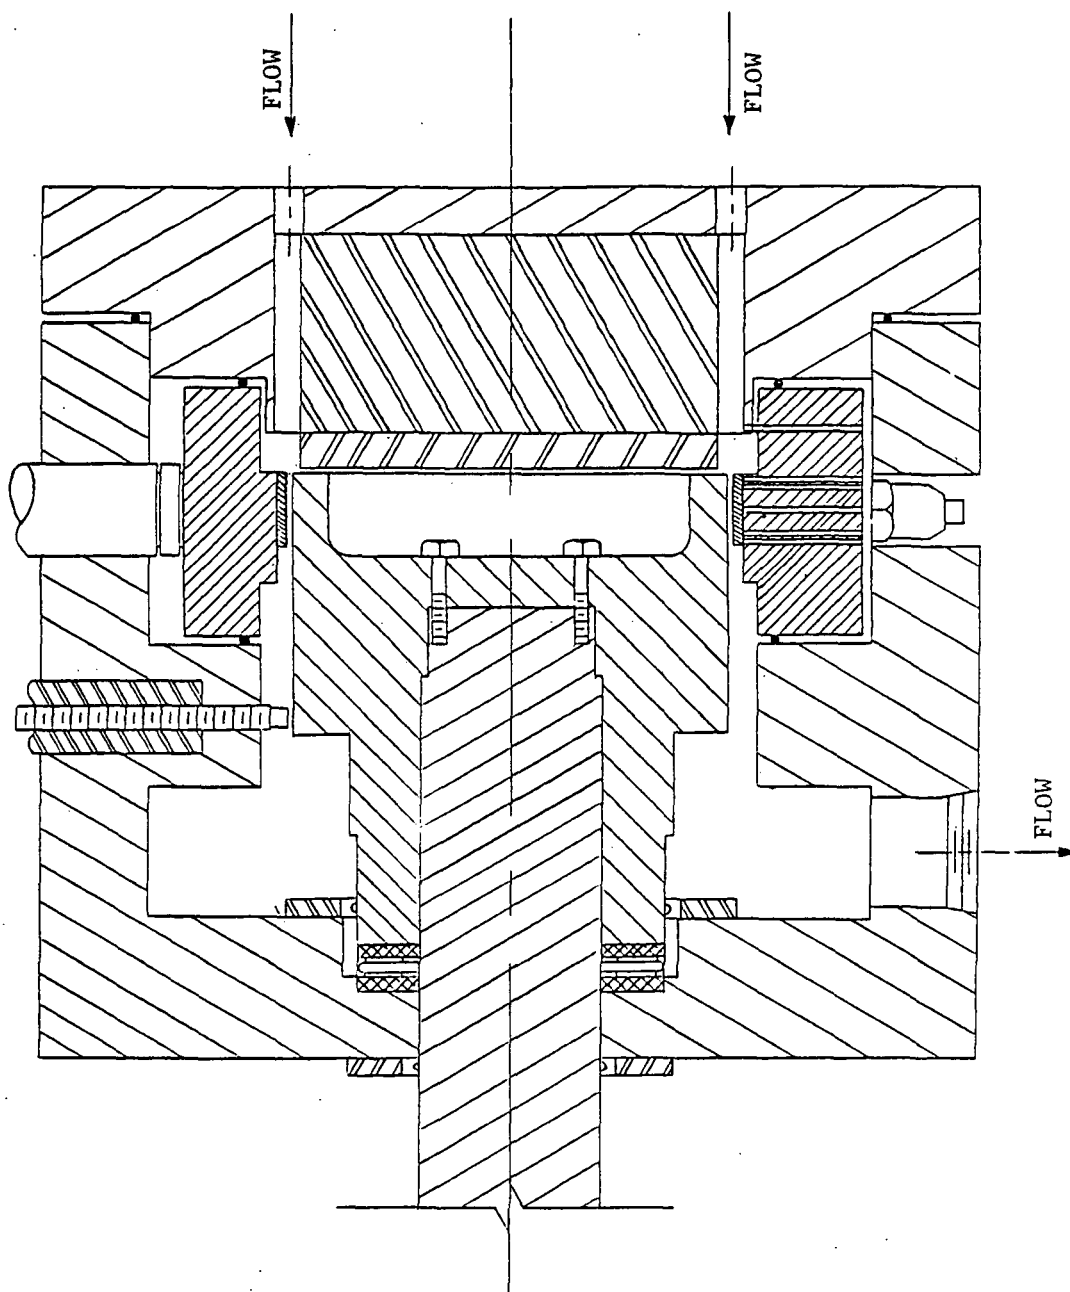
Cross-sectional view of test section showing honeycomb stator.
